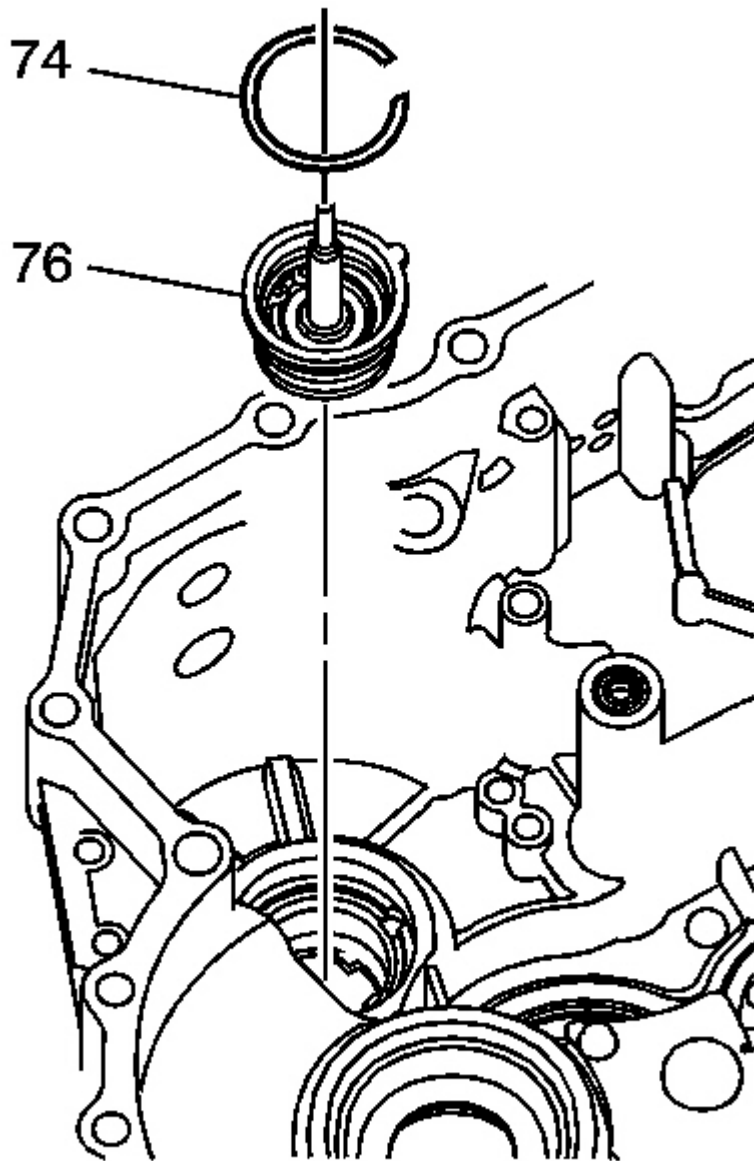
1st/Coast Clutch Apply Fluid Collar & 1st/2nd Clutch Shaft Shim
